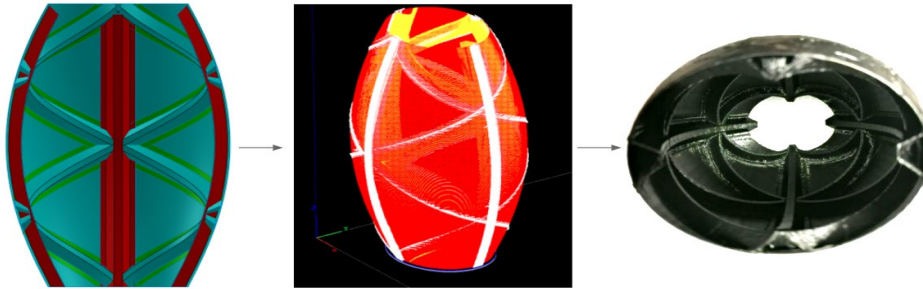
Test Printing on Non-Uniform Cross-Section Geometry
